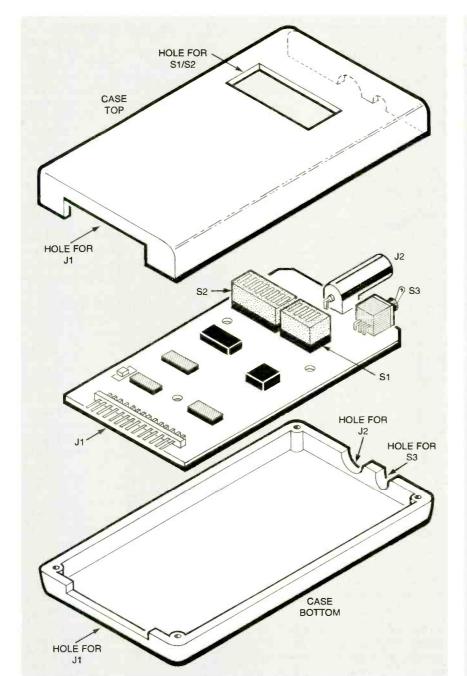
The Multichannel Oscilloscope Trigger fits nicely into a small hand-held case. Several holes will need to be cut at specific locations in order for the controls to be accessible.
